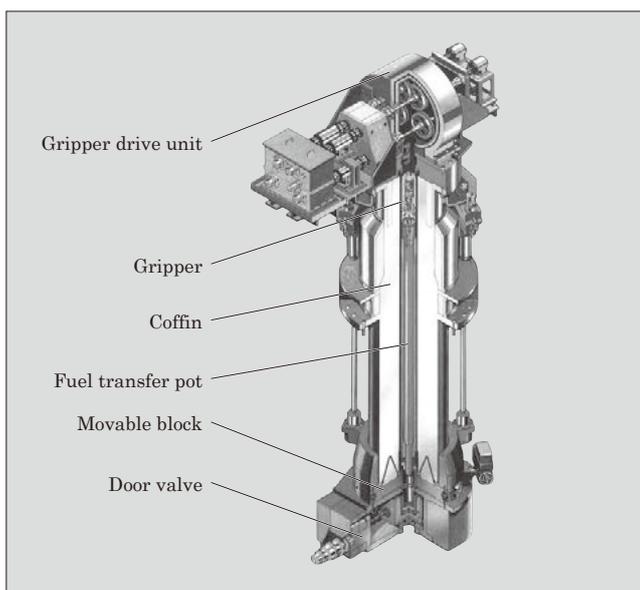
Ex-vessel fuel transfer machine A (Machine B basically has the same configuration.)
